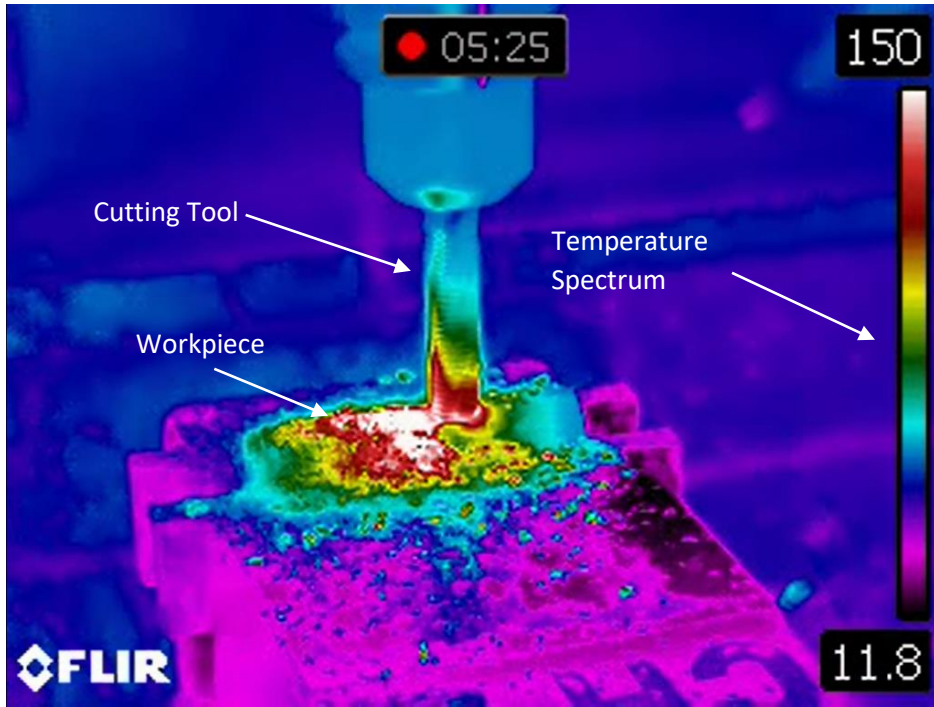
Thermal Image of Workpiece Pre-cooled and Machined
